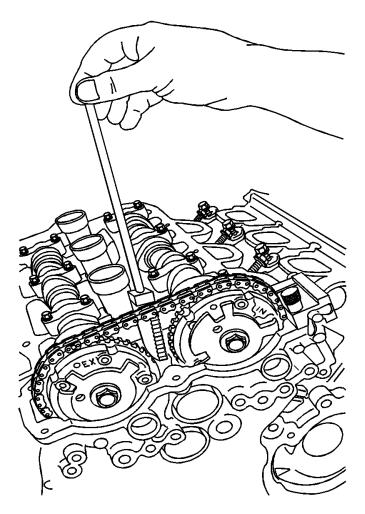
Retainer Wedge Courtesy of GENERAL MOTORS COMPANY
